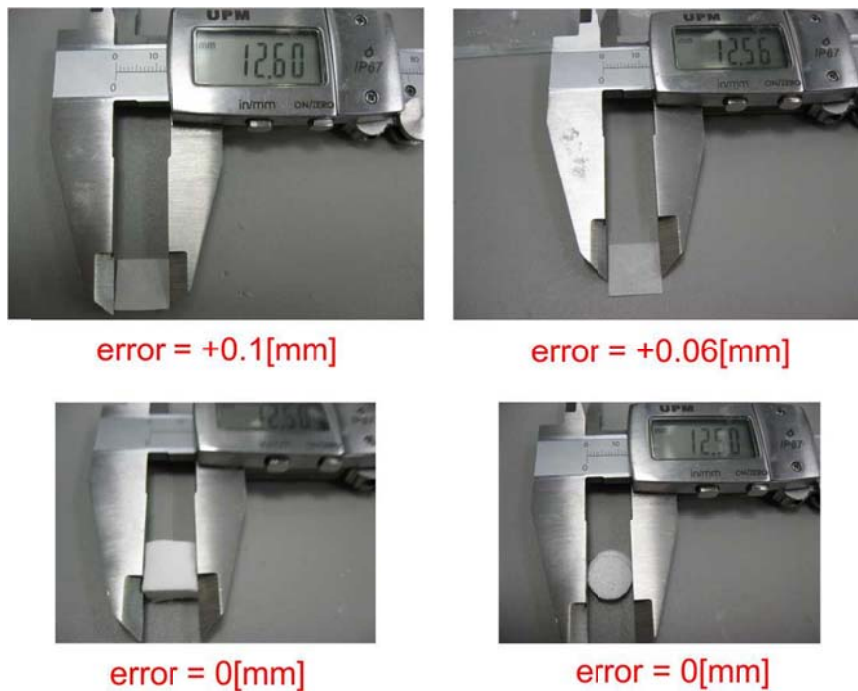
Vernier caliper measurements of the manufactured two-dimensional and three-dimensional parts
